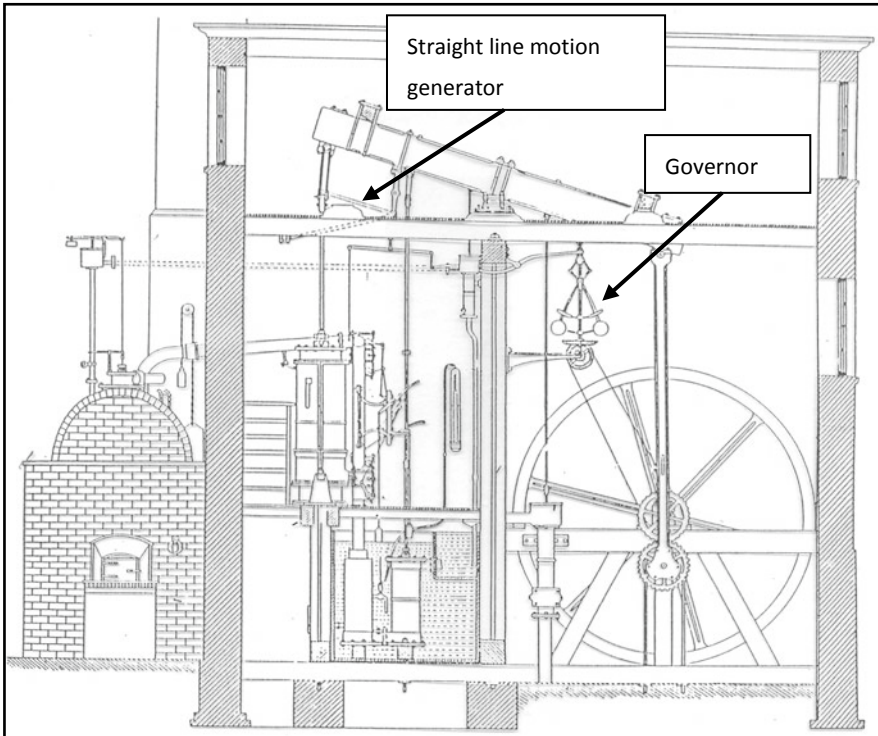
Drawing of a double-acting rotary engine designed by Watt
